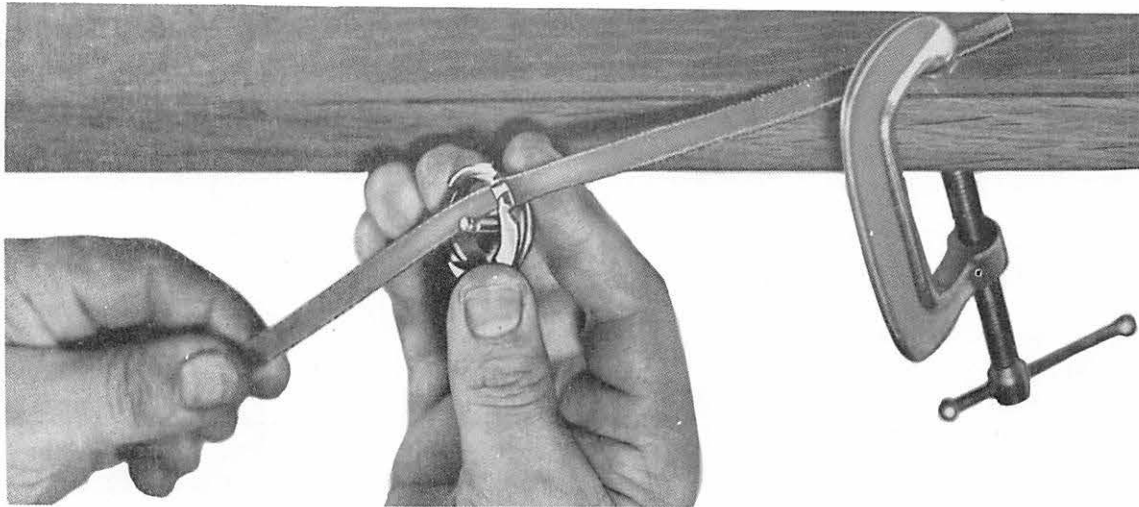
Stringing Needle Guard of Bobbin Case Holder
